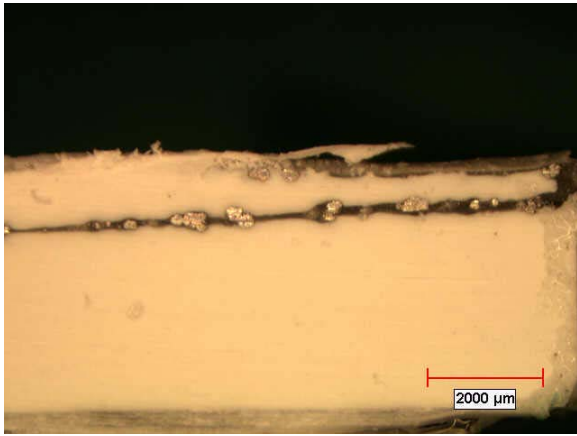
Y-cross sectional view of electromagnetic welded sample
